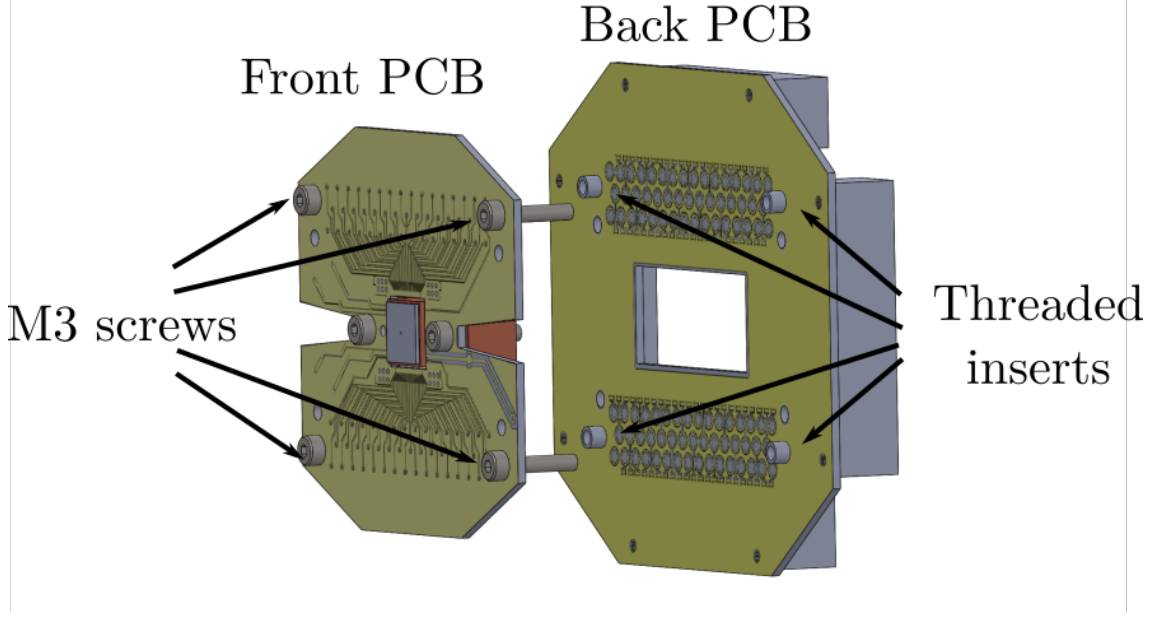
Exploded view of the PCB assembly. To apply sufficient pressure to the front PCB, the four M3 screws are tightened into the threaded inserts of the back PCB. The inserts are epoxied directly on the back PCB.
